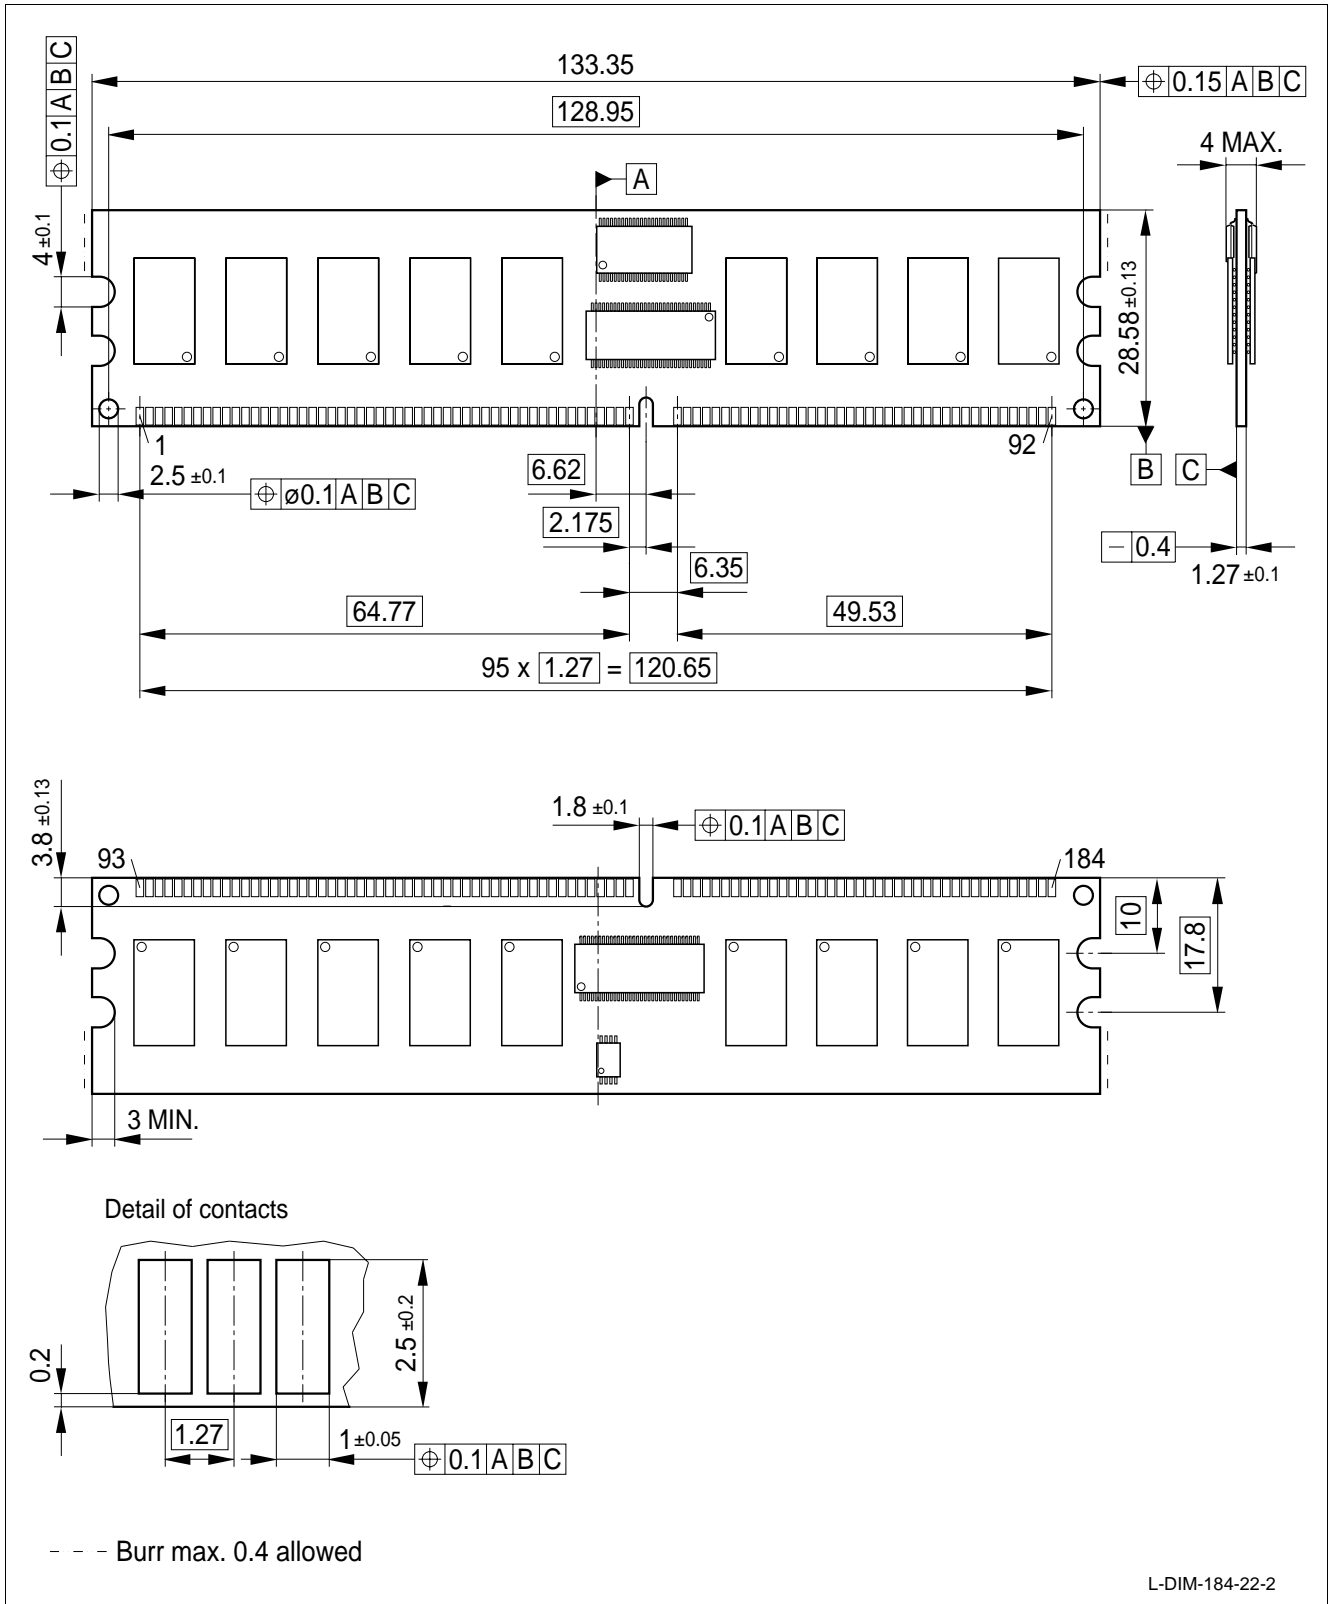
Package Outline – Raw Card C DDR Registered DIMM HYS72D128300GBR-[5/6/7]-B
